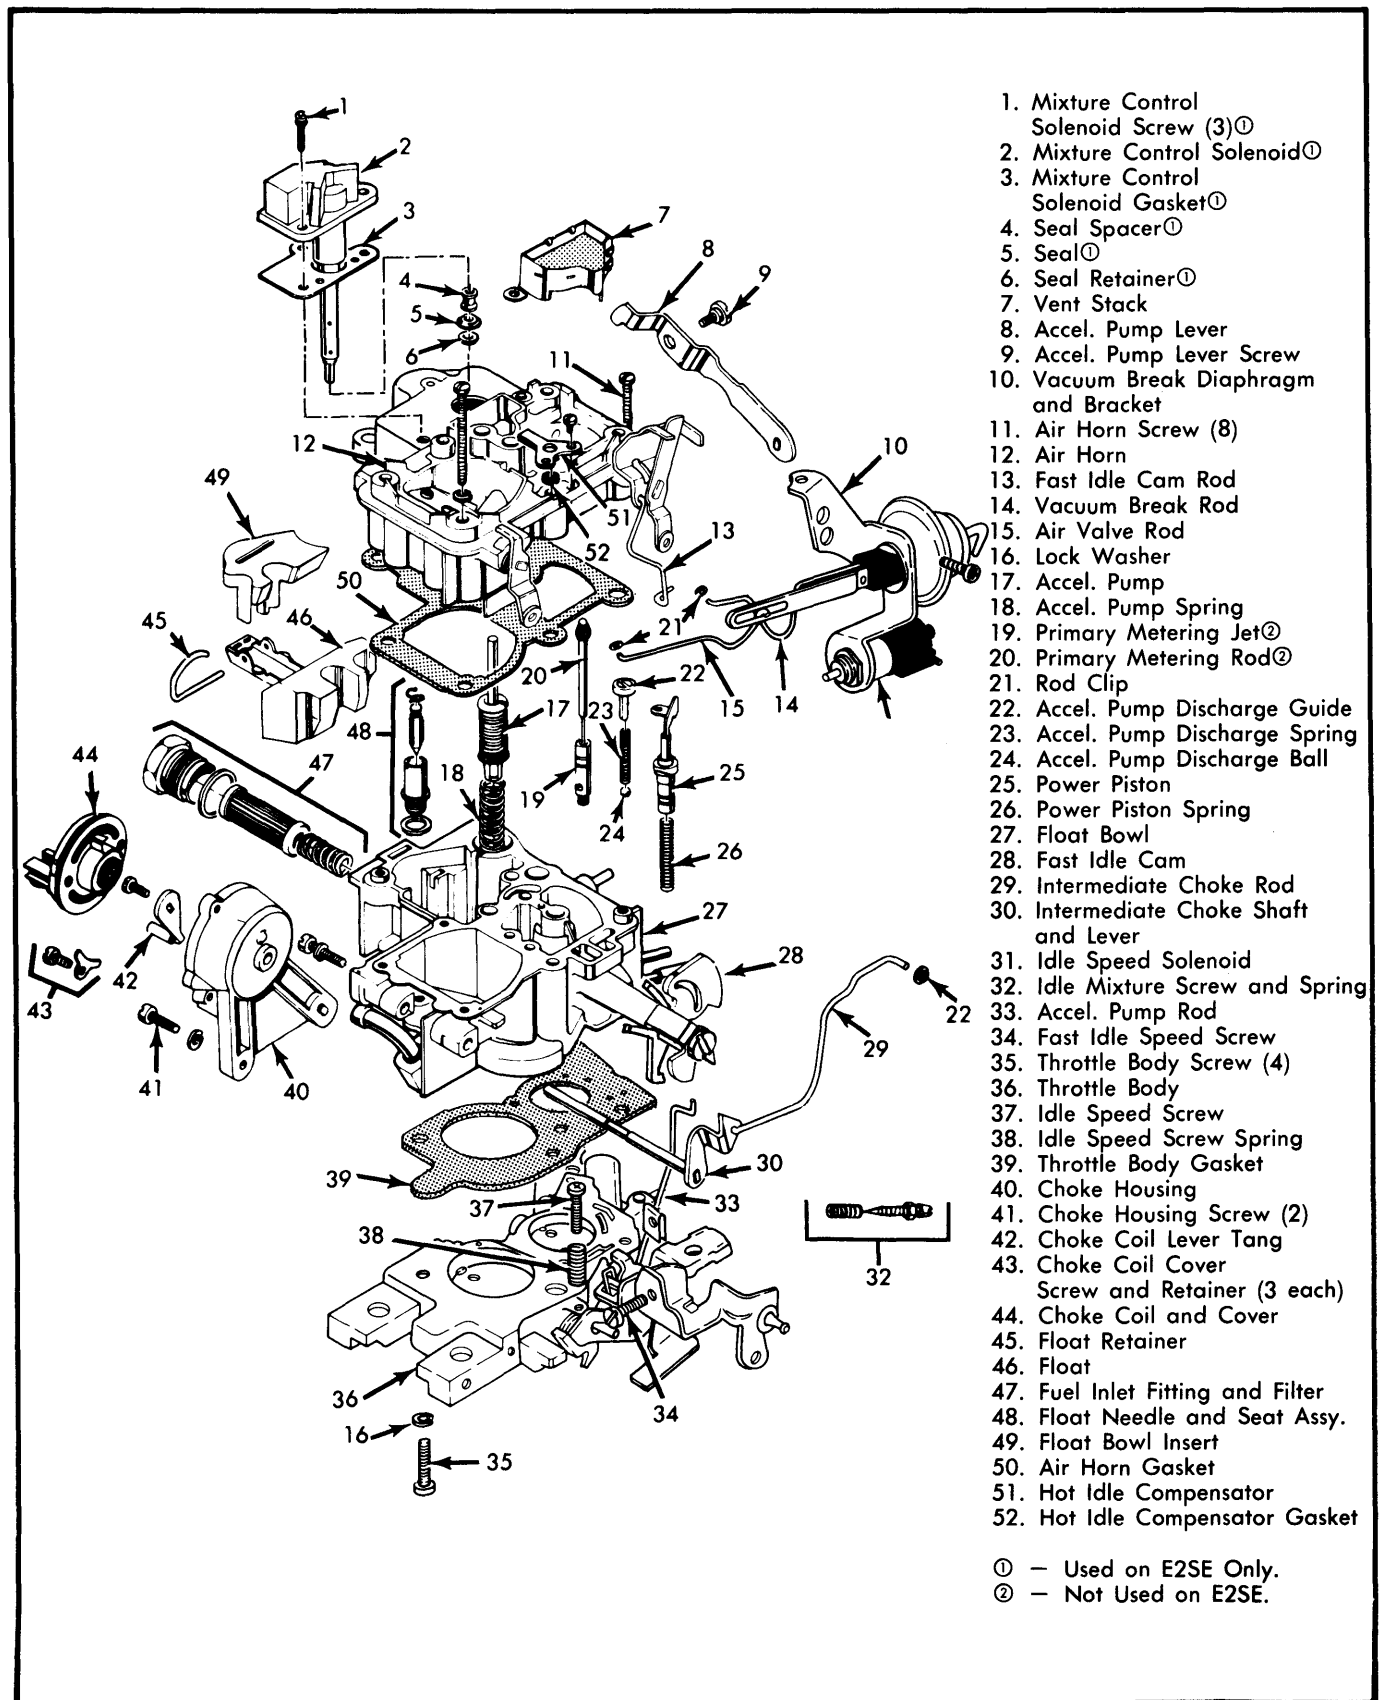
Exploded View of Rochester Model 2SE and E2SE 2-Barrel Carburetor (4 CYLINDER MODELS)
